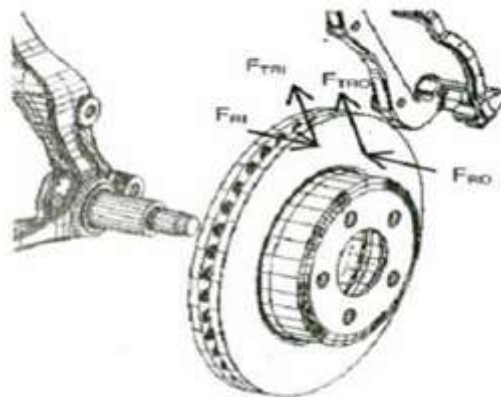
Forces Acting on Rotor Due to Contact with Brake Pads
